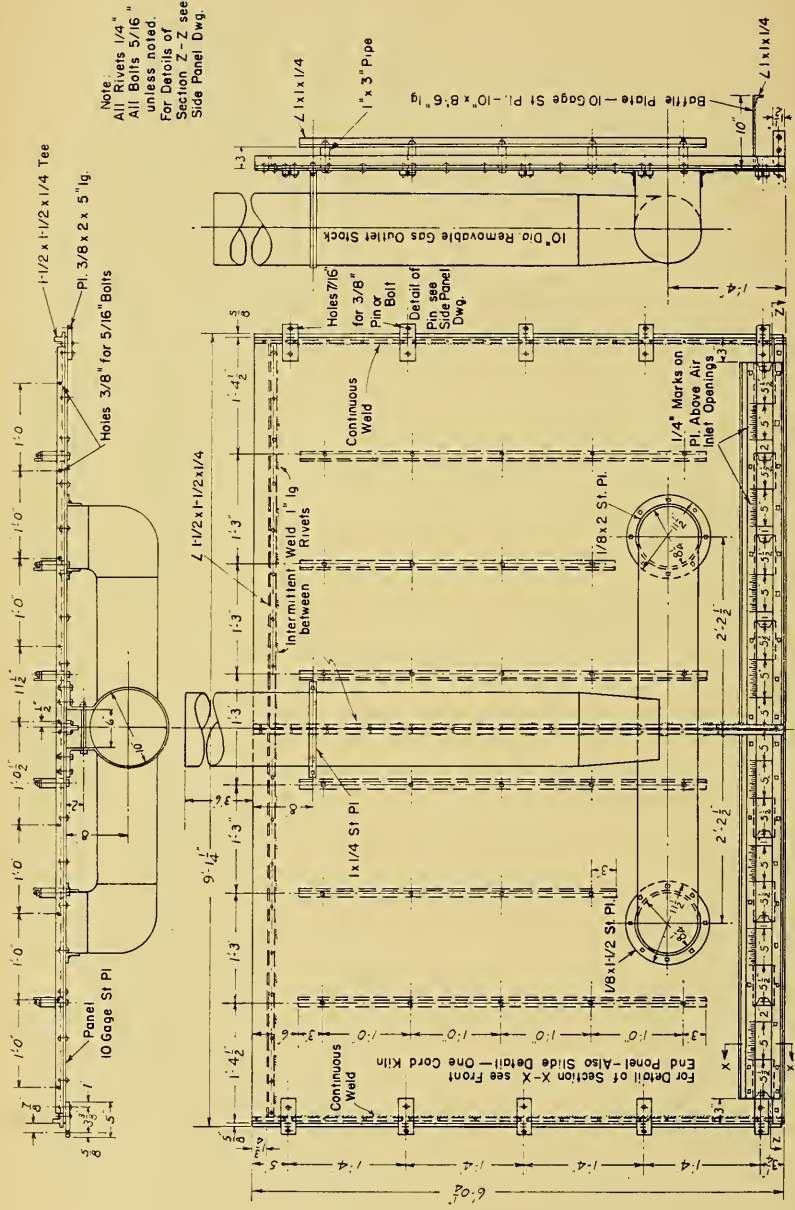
Four cord kiln. Front end panel and gas outlet stack. For details of air inlet slide construction, see Figure 4.
